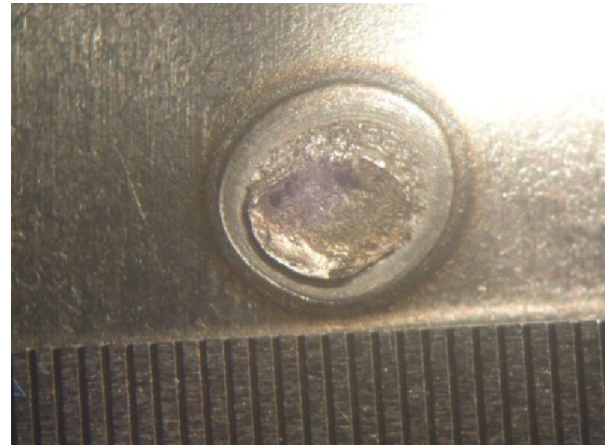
Failure mode of dissimilar spot welded joint.
